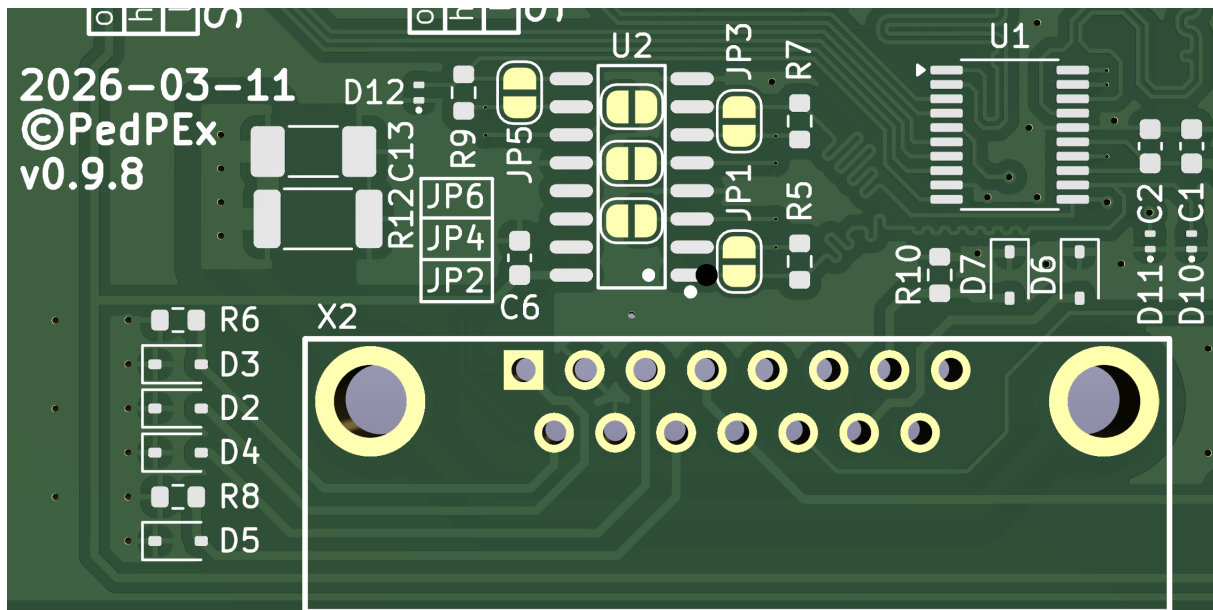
PCB Layout Interpolator  $U1$  and RS422 Output Driver  $U2$
